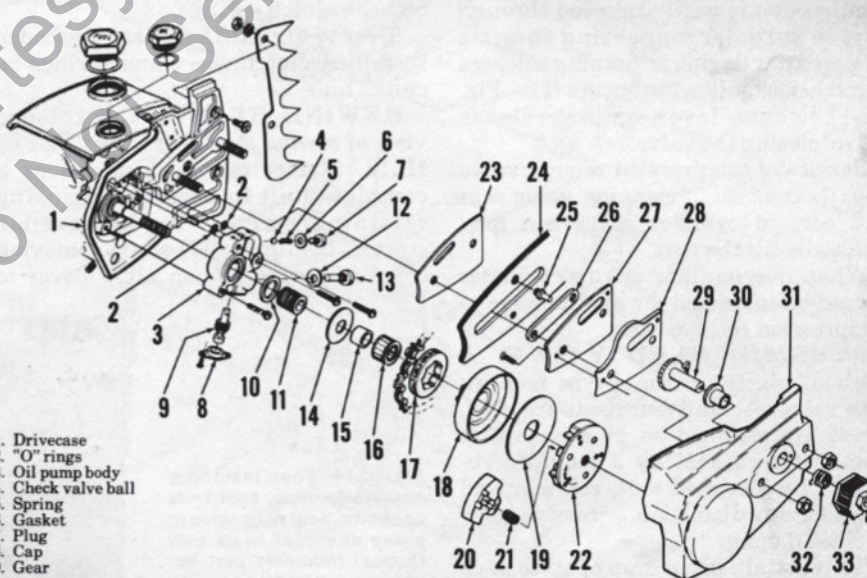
Exploded view of automatic oil pump and clutch assemblies. Chain adjusting components (23 thru 33) are used on EZ 250 Automatic models only. Sprocket (17) and clutch drum (18) are integral on some models.
